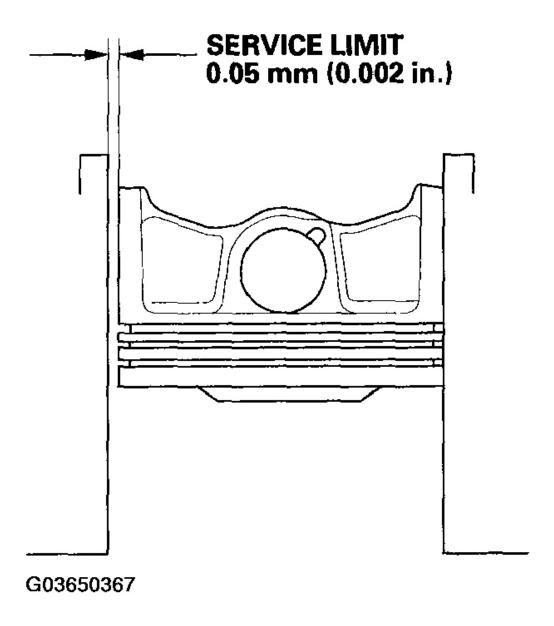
Calculating Difference Between Cylinder Bore Diameter And Piston Diameter
